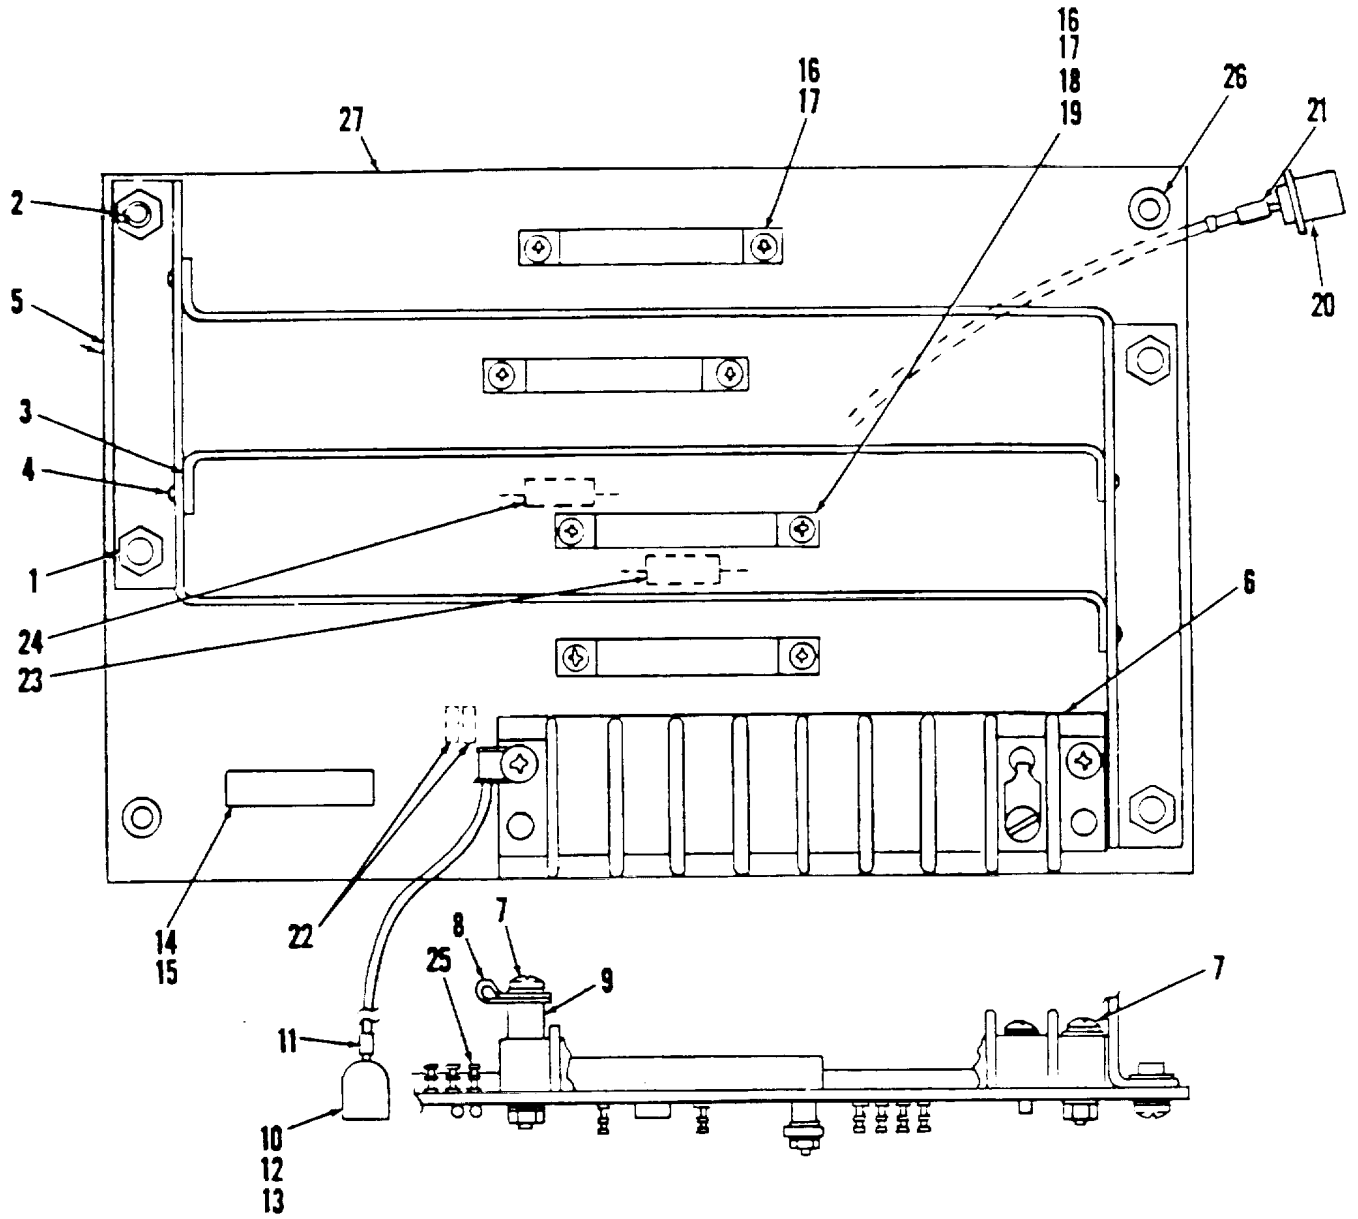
Circuit Card Assembly, Horizontal Deflection A3
